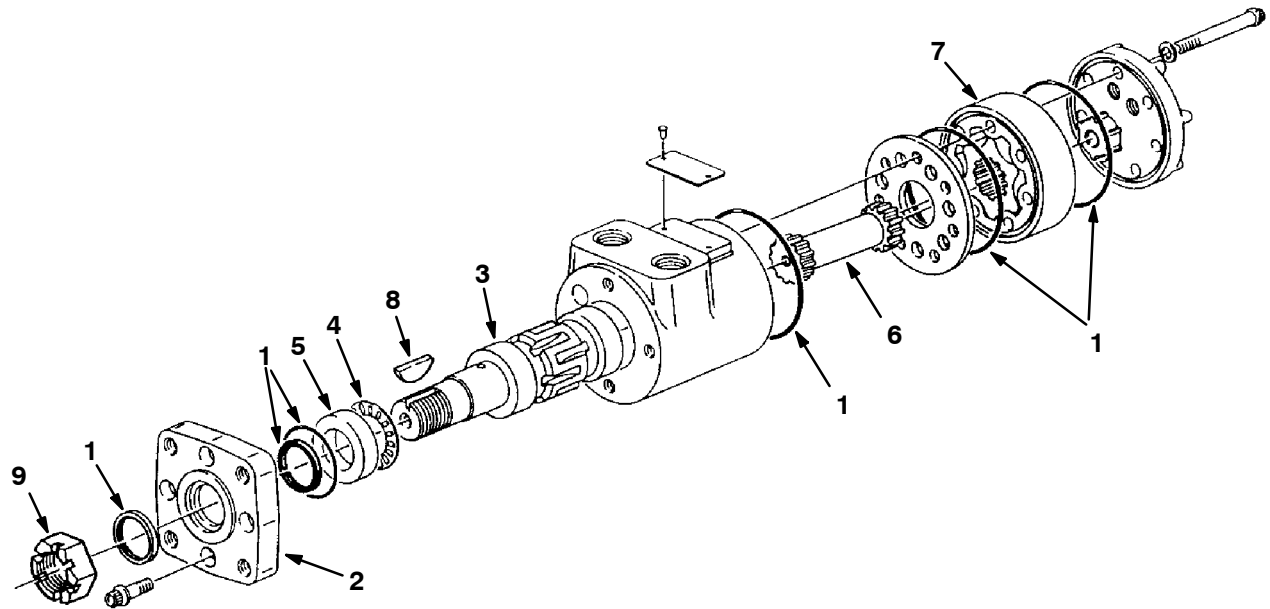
Hydraulic Motor Breakdown, 27800
